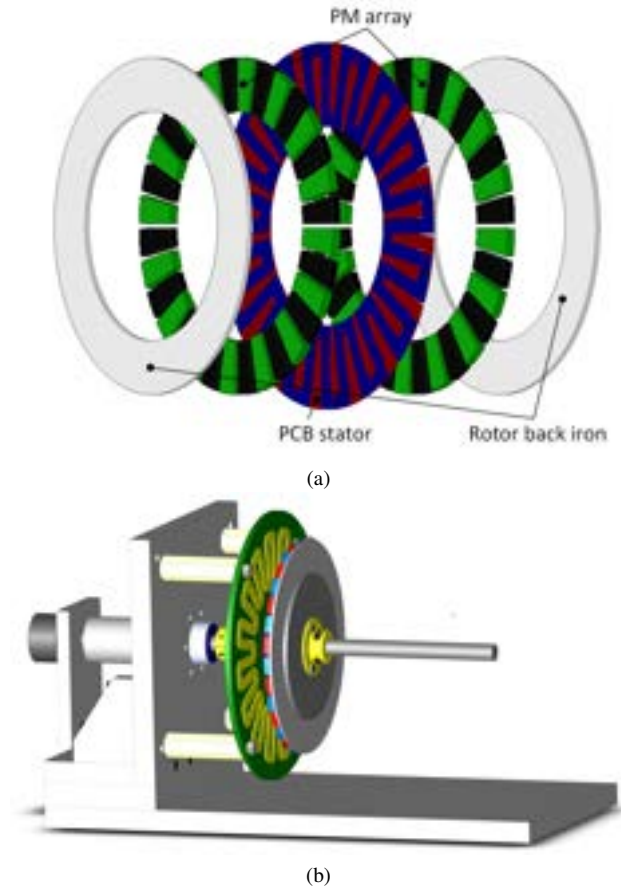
Motor prototyping and testing, (a) exploded view of coreless prototype with PCB stator windings, (b) test fixture with motor installed. The developed fixture is capable of testing AFPM machines with various airgap lengths.
